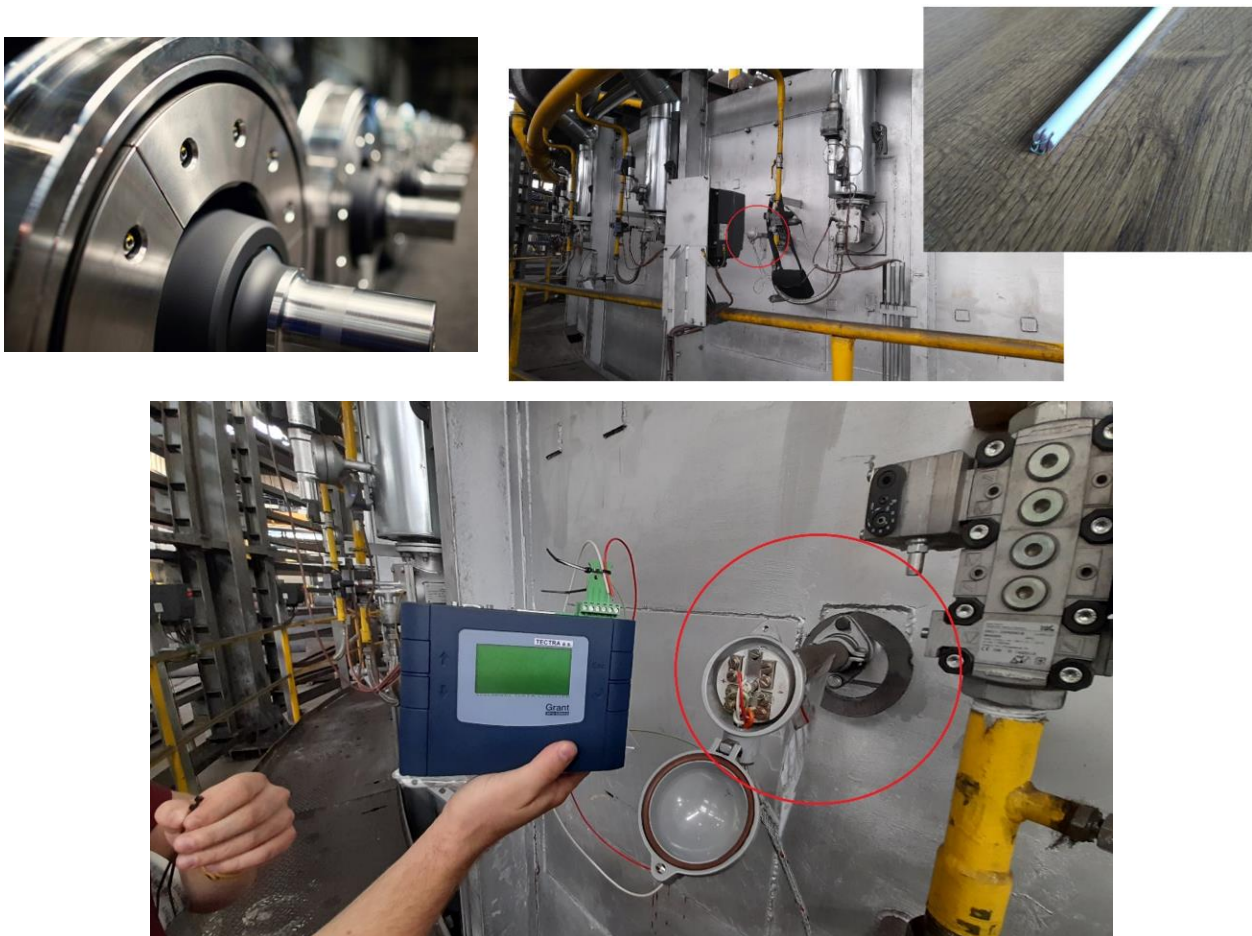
Top left: steel train wheel component produced by Bonatrans. Top right: external wall of the heat treatment furnace with thermocouple assembly emerging from the furnace; inset: thermocouple assembly with protective tubes removed. Bottom: detail of thermocouple assembly on external wall of furnace (encircled in red), with associated instrumentation.
